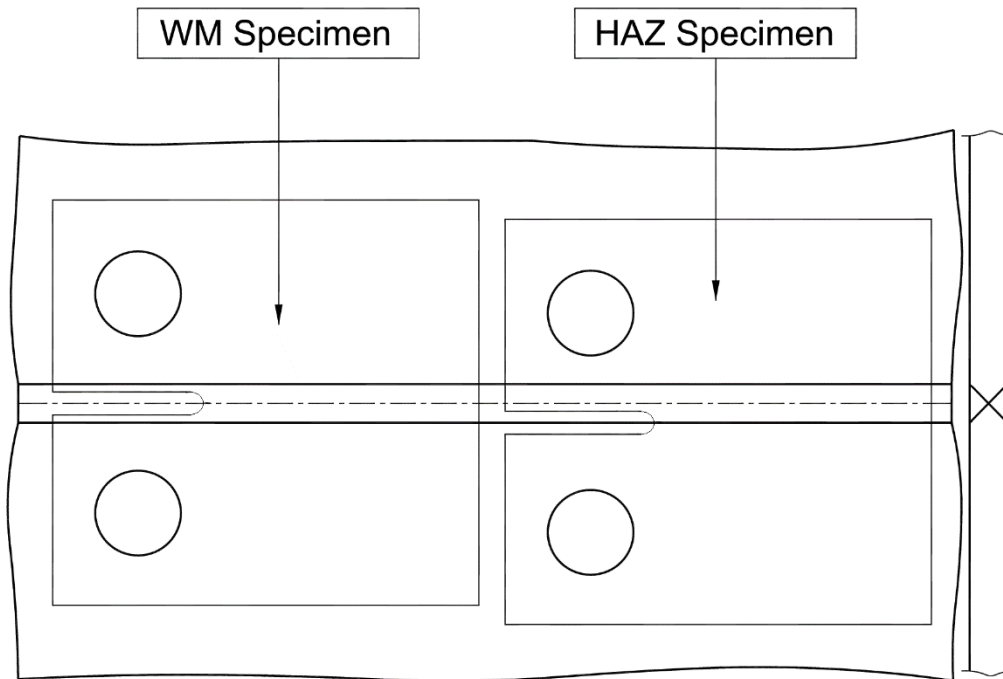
Schematic representation of the location of specimens containing weldments.
